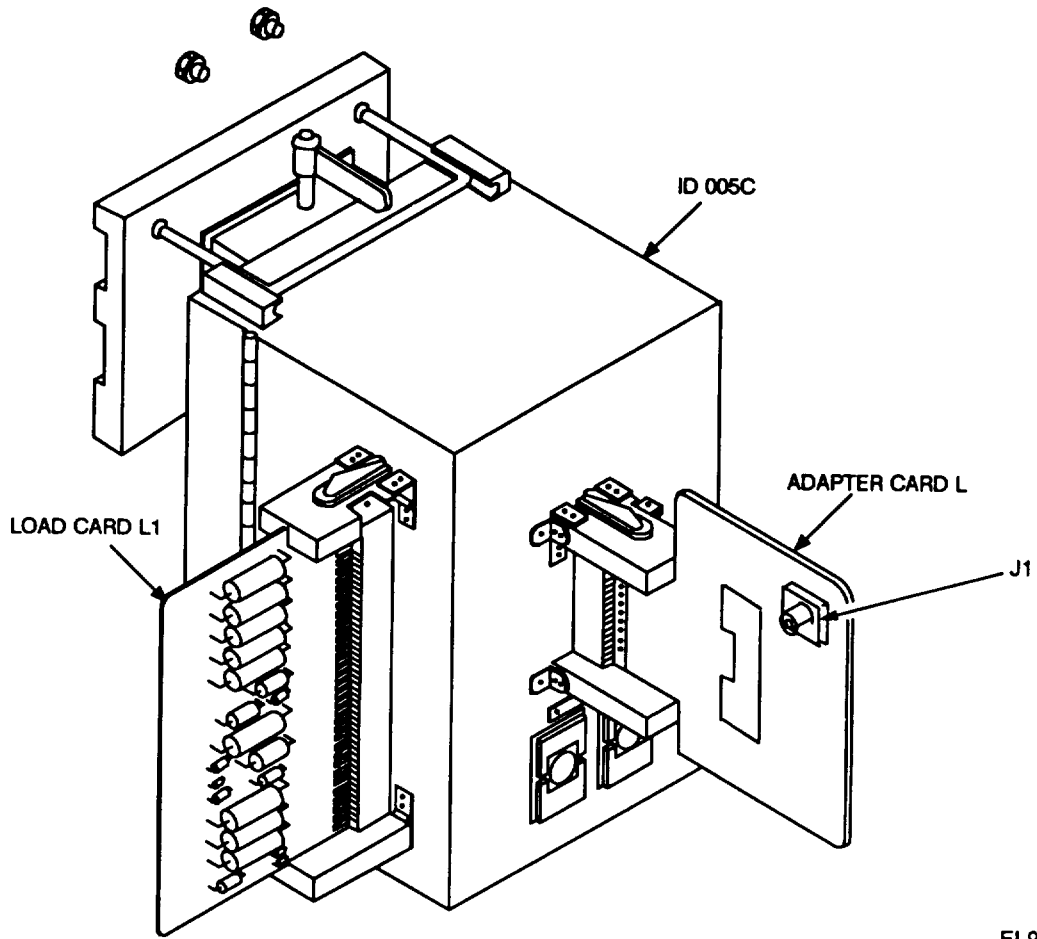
Power Supply Module Assembly (1A3) A3019261-1
